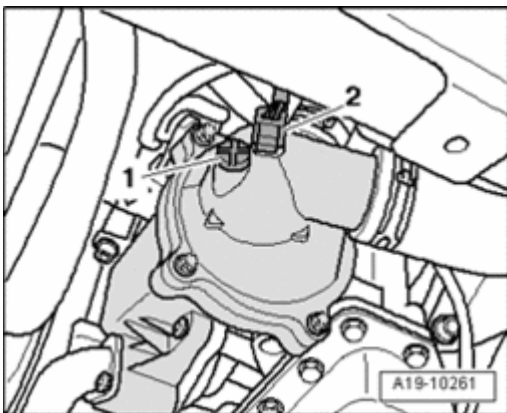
Removing/Installing Drain Plug On Map Controlled Engine Cooling Thermostat F265
